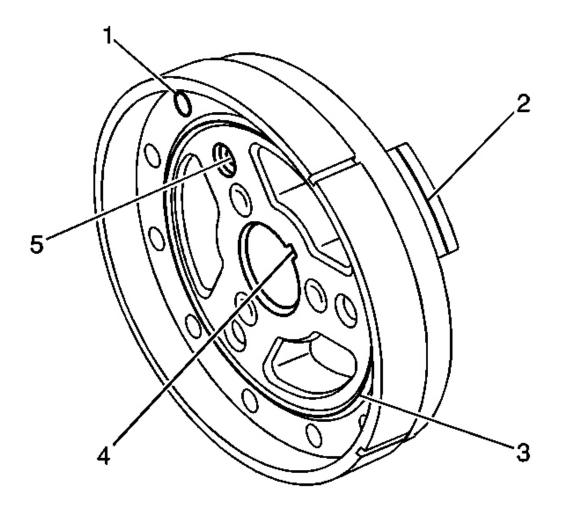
Crankshaft Balancer Cleaning & Inspection Areas Courtesy of GENERAL MOTORS CORP.
